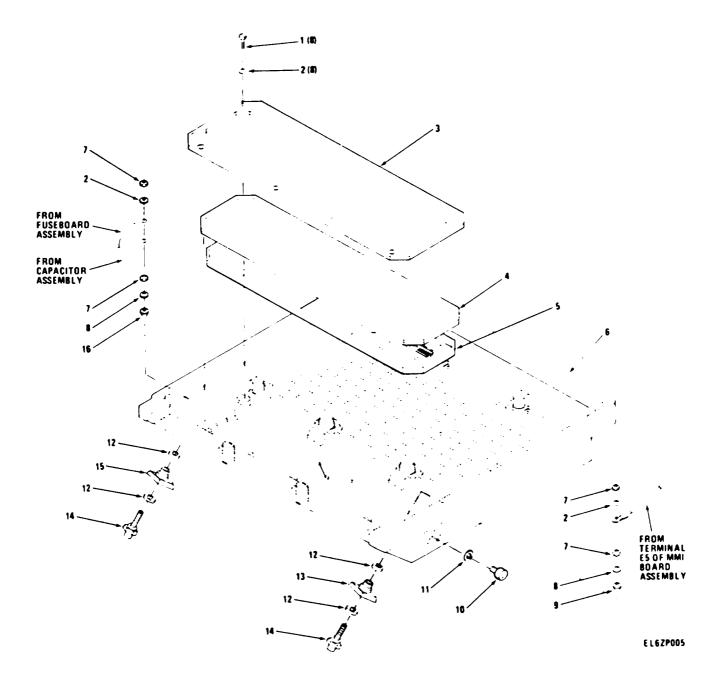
Keyer-Message Device KY-879/P, Top Casting Assembly.
